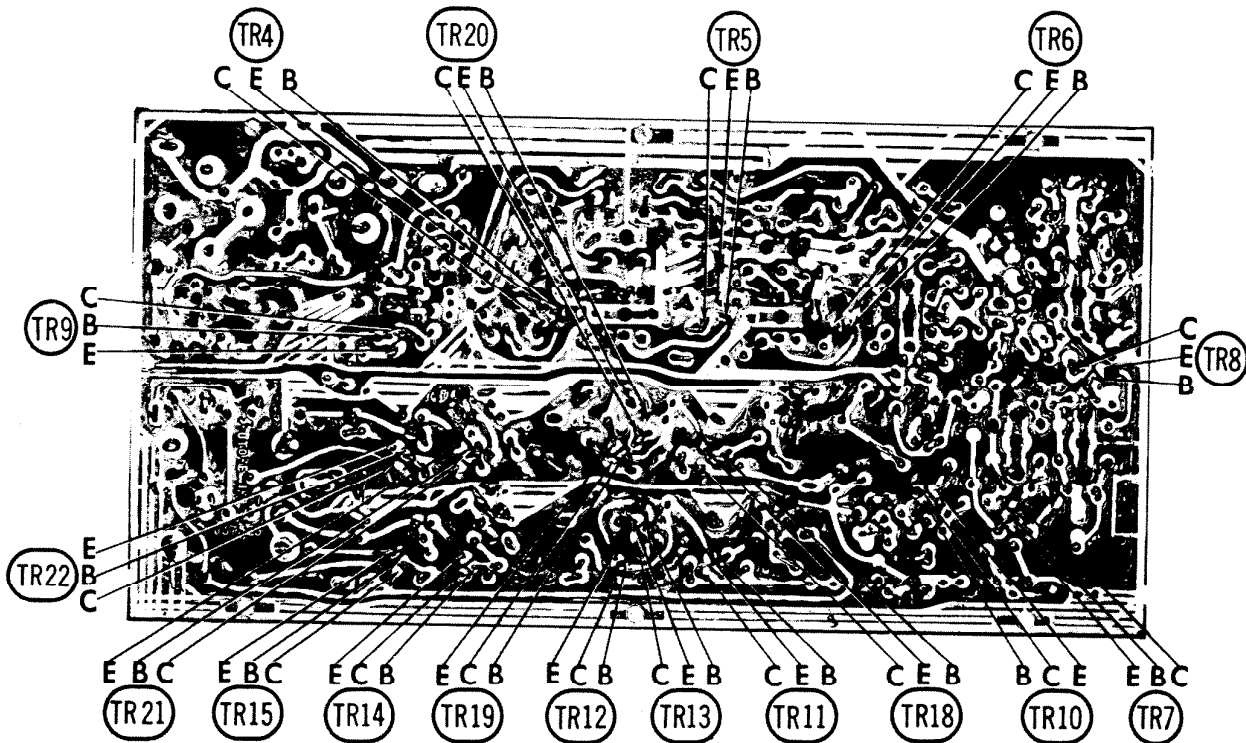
Bottom view of receiver printed board—transistor CircuiTrace points.
